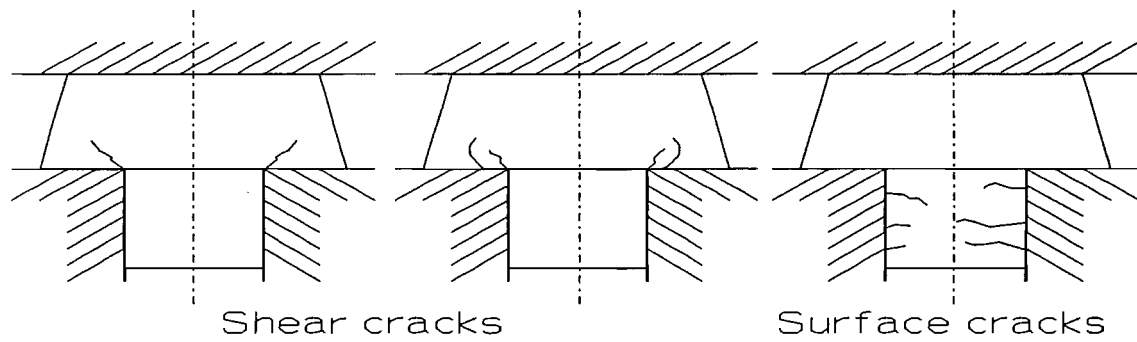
γ -Crack, a crack which appears at the corners of extruded material in free extrusion. Cracking occurs at the boundary between dead metal and plastic zone.
